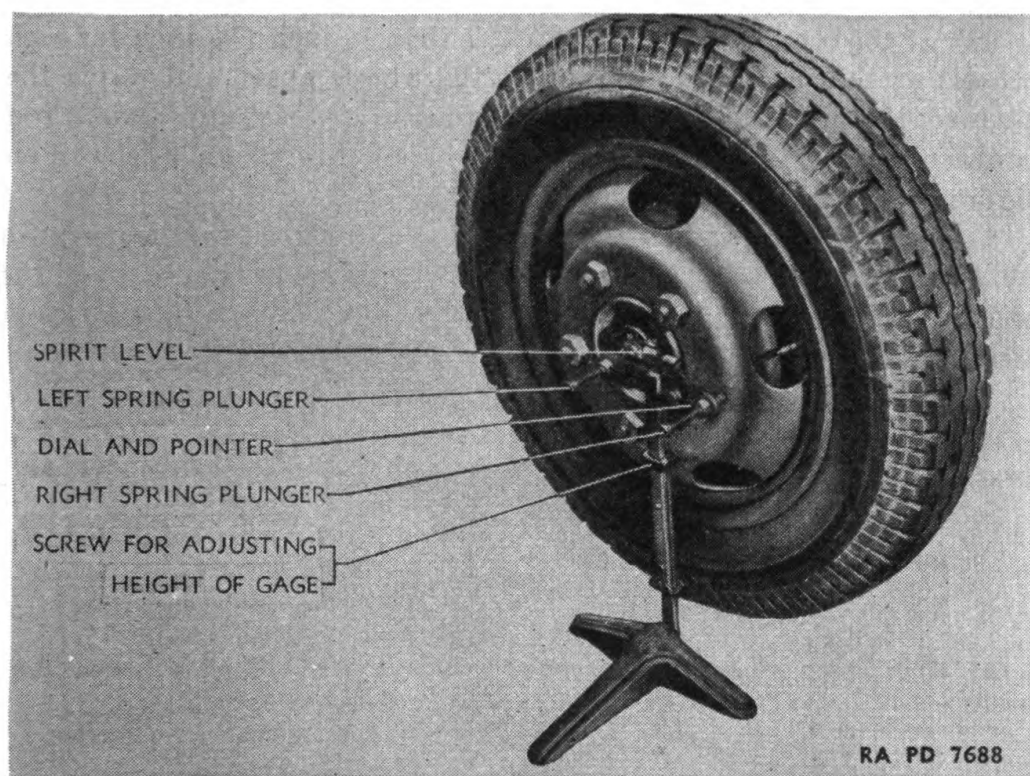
Caster gage w/left spring plunger in wheel spindle lathe center.
